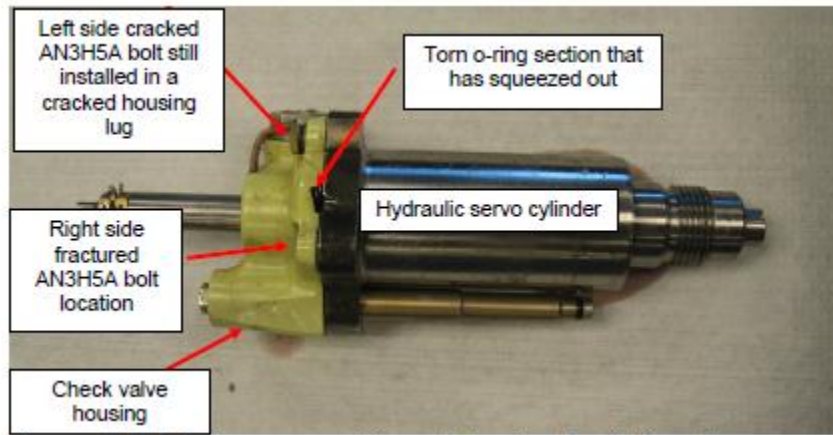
Pedal damper assembly at Sikorsky Trumbull prior to disassembly. The cylinder, bolts, housing, and o-ring were sent to the Materials Lab.
